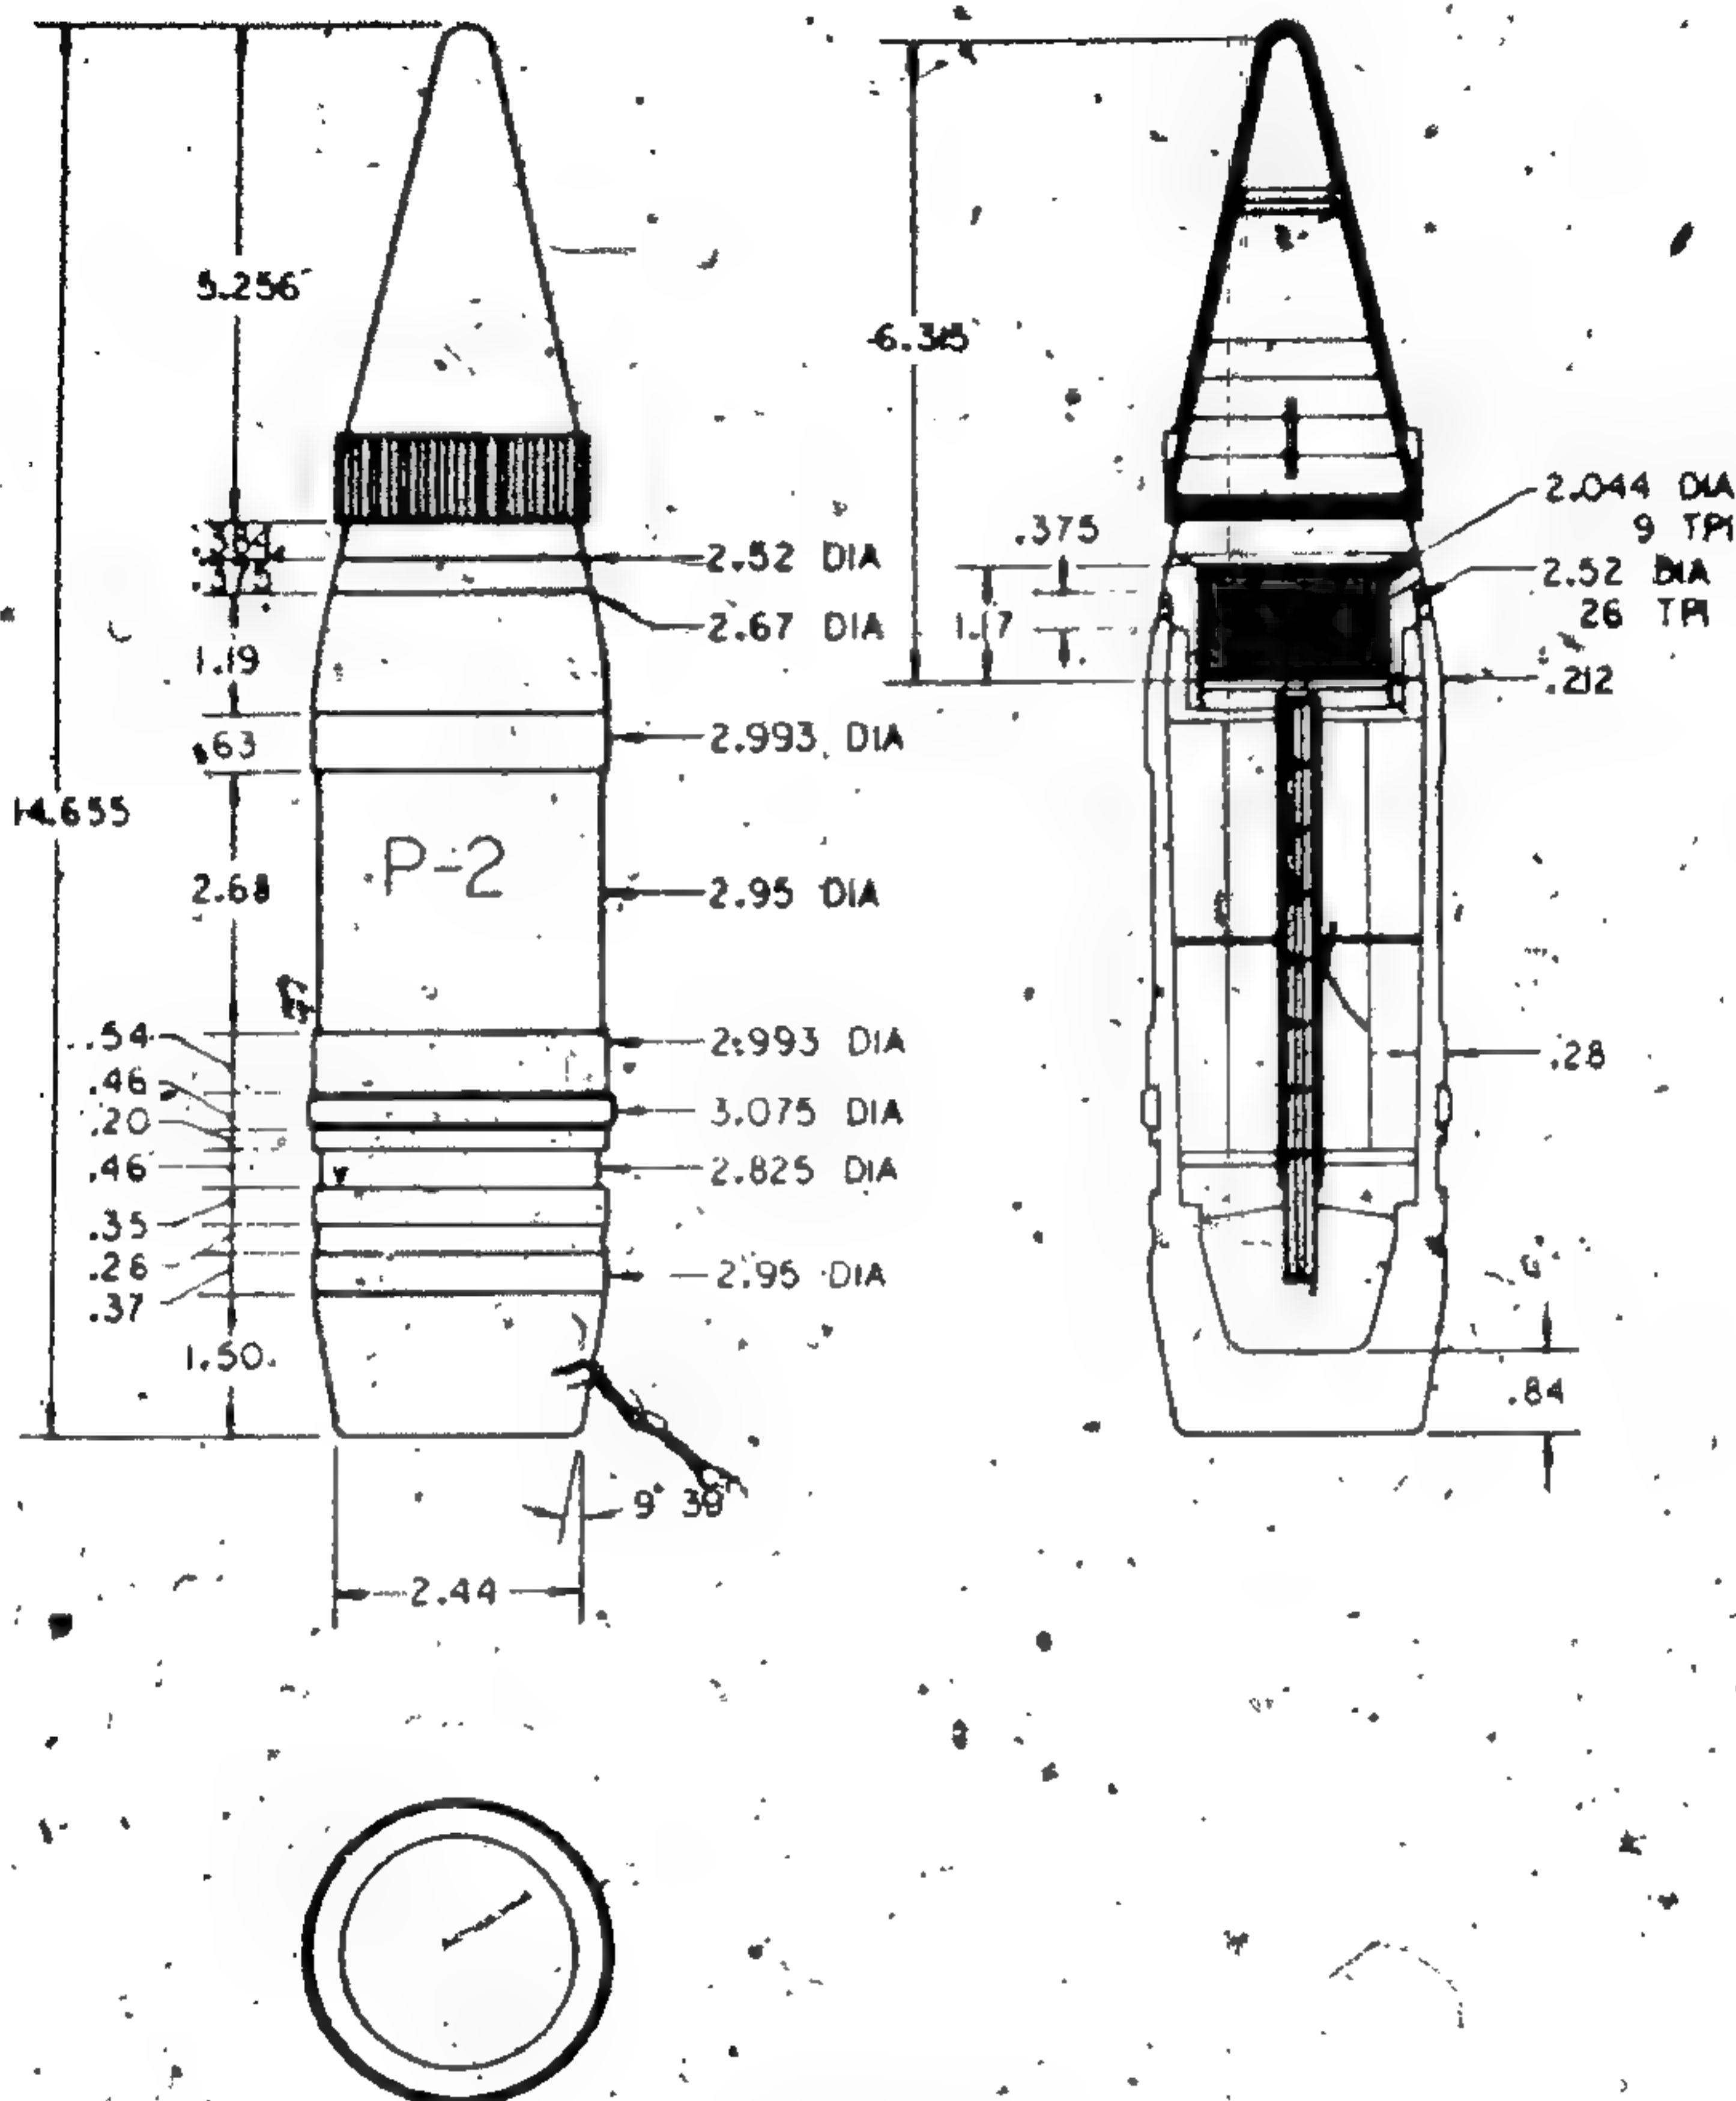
Soviet 76-mm shrapnel projectile Model Sh-354G.
